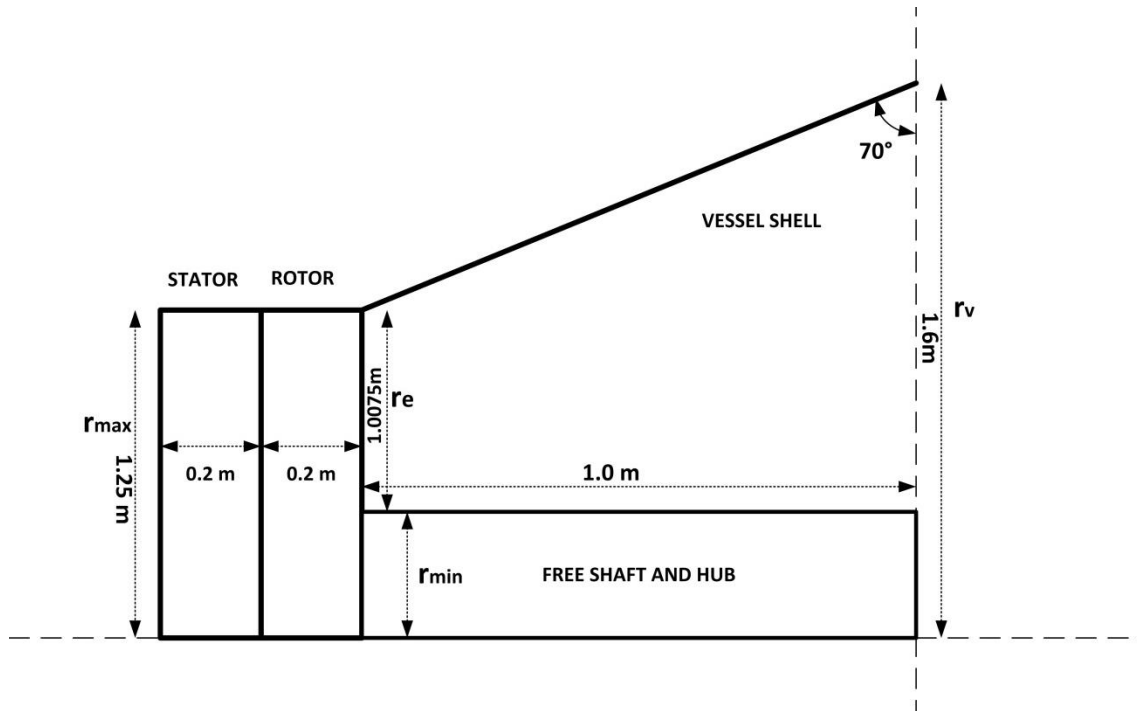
Centrifugal Expeller Section Indicating Device Dimensions and Radii
